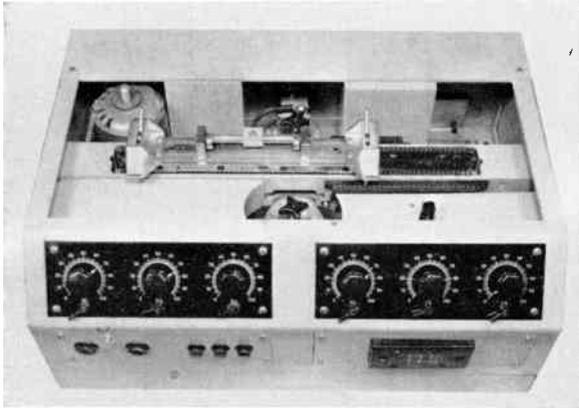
Automatic spot-welding machine for single-sideband filters.
